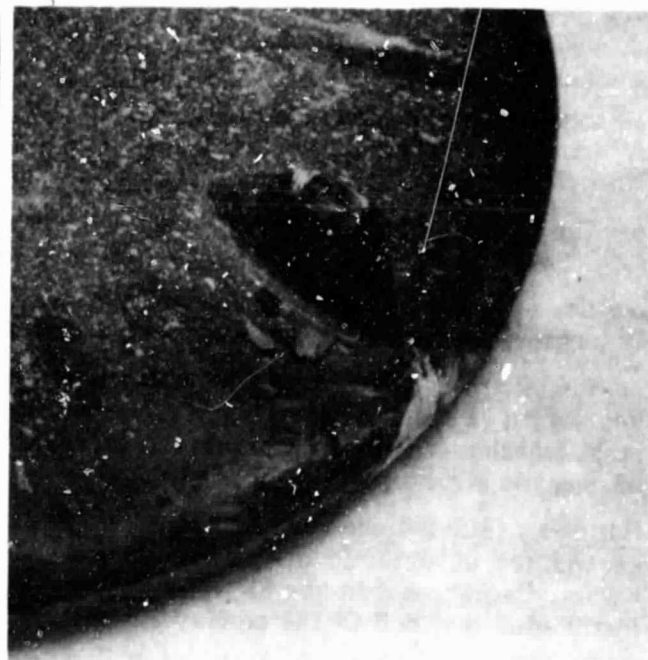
Chipped Ceramic Combustor Baffle Support Leg.
